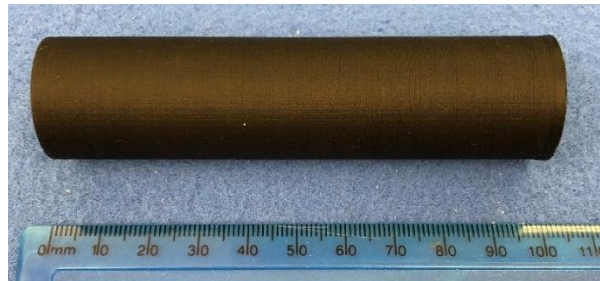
3D printed conductive PLA cylindrical mandrel
